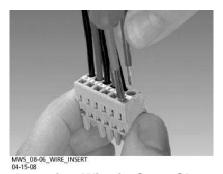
Inserting Wire in Cage Clamp Type Connector
